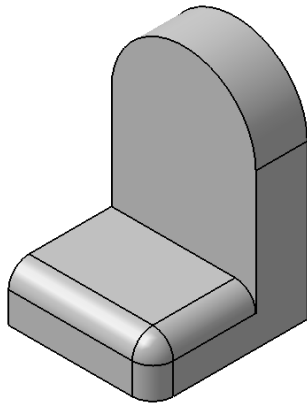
Resulting fillet with the Trim ribbons check box cleared
